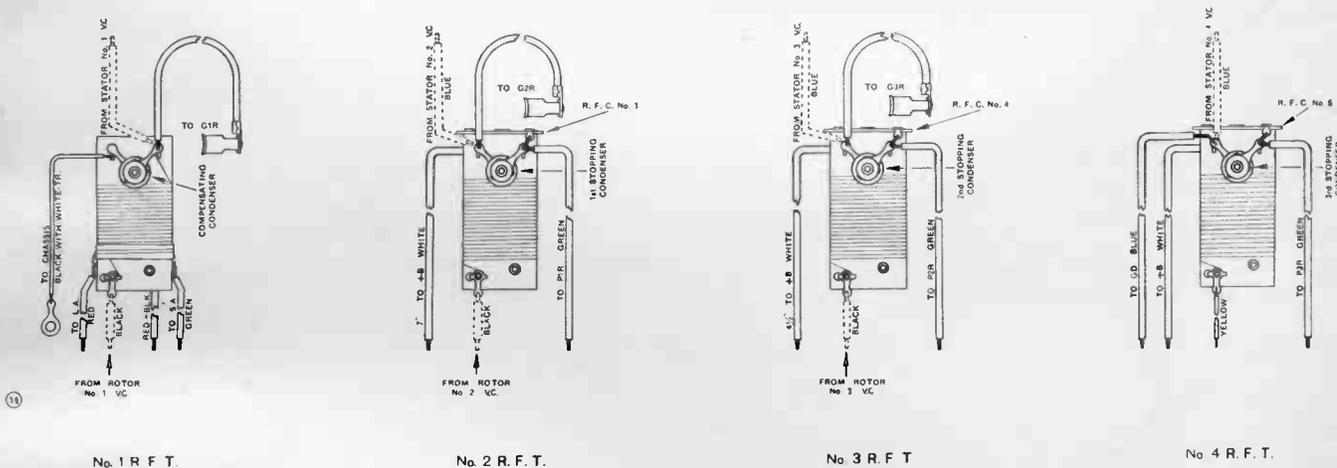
CONNECTIONS OF R. F. COIL GROUP IN L-2 AND F CHASSIS.
